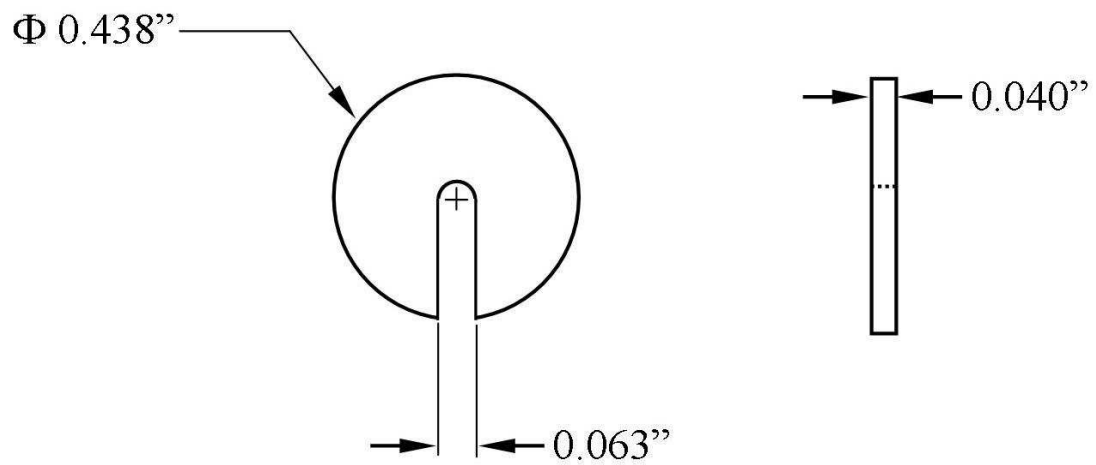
Drawing of the PTFE plates that sandwich the solenoid bobbin (cf. Fig. 2.21) inside the solenoid housing (cf. Fig. 2.20) to retain the electrode after retraction.
